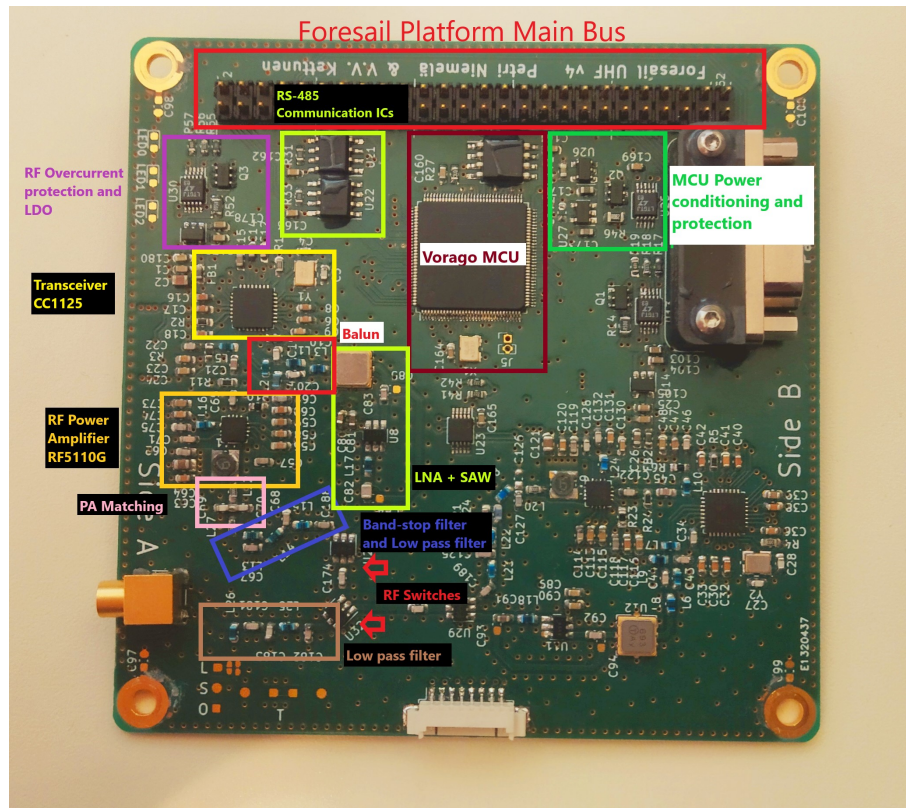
PCB layout of the Foresail-1 UHF Communications subsystem v4. The main sections of the "Side A" radio design is shown. A nearly identical layout is used for the Side B of the PCB.
